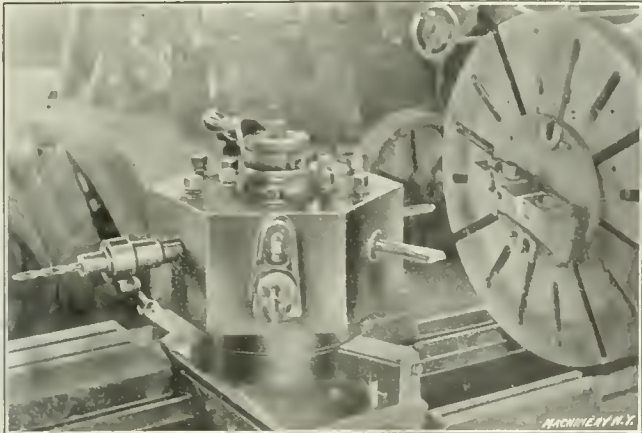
Screw Machine Chuck and Tools for Friction Slides
